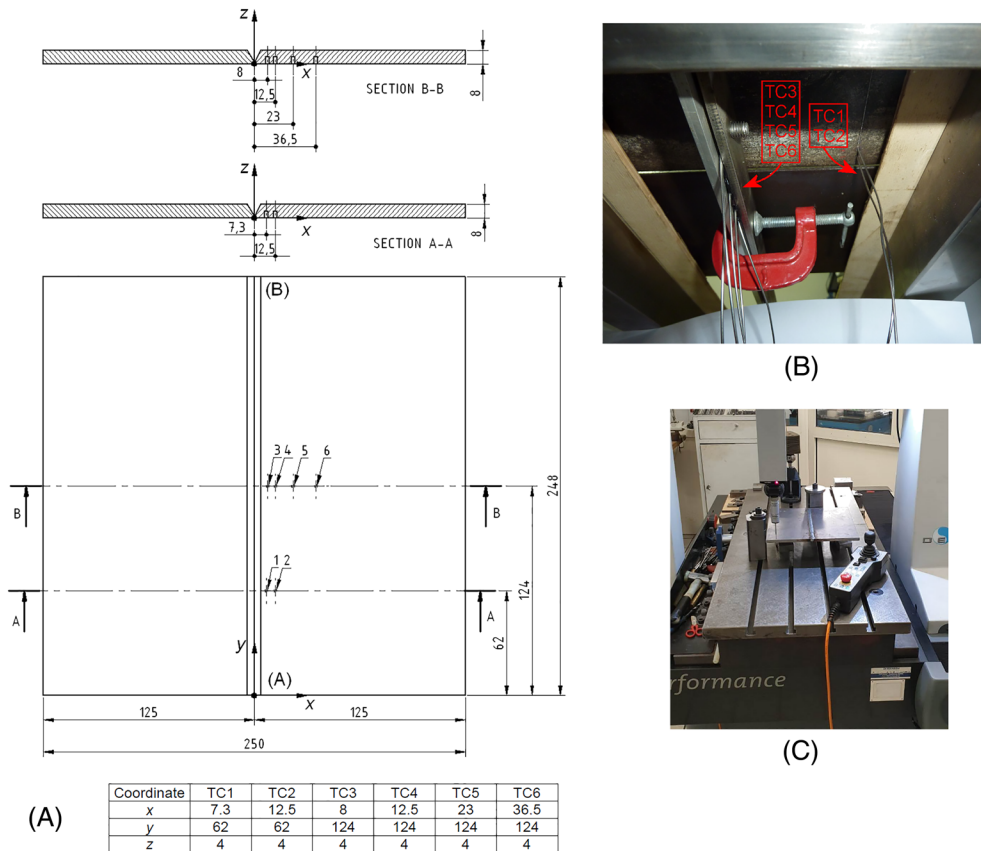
(A) Layout of thermocouples, (B) thermocouples installed and (C) distortion of the welding joint measured by means of a coordinate measuring machine (CMM)
